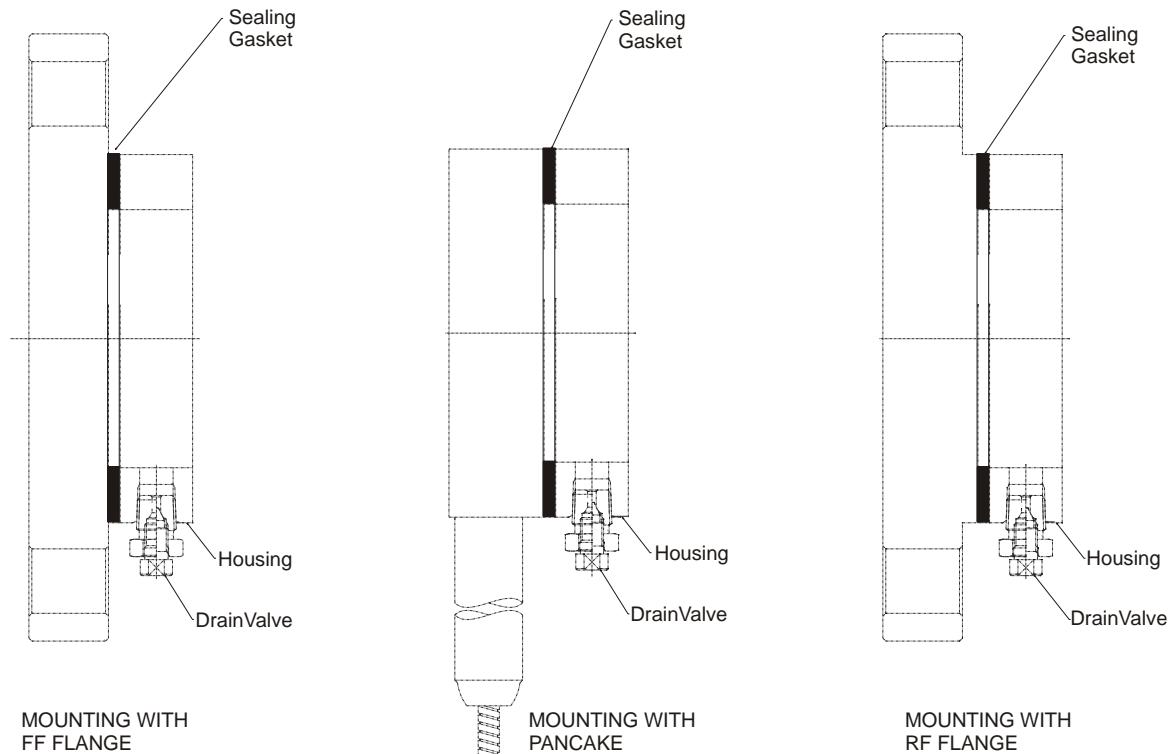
Sectional View - Mounting with Gasket and Drain Valve
